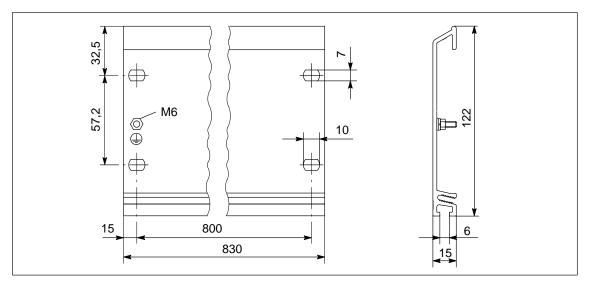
Dimension Drawing of the Rail with 830 mm Standard Width
